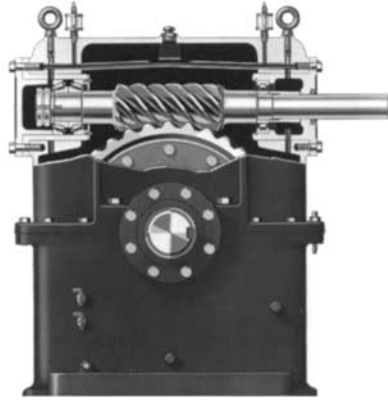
Photograph of a worm-gear speed reducer. Notice that the gear partially wraps, or envelopes, the worm. (Cleveland Worm and Gear Company.)
